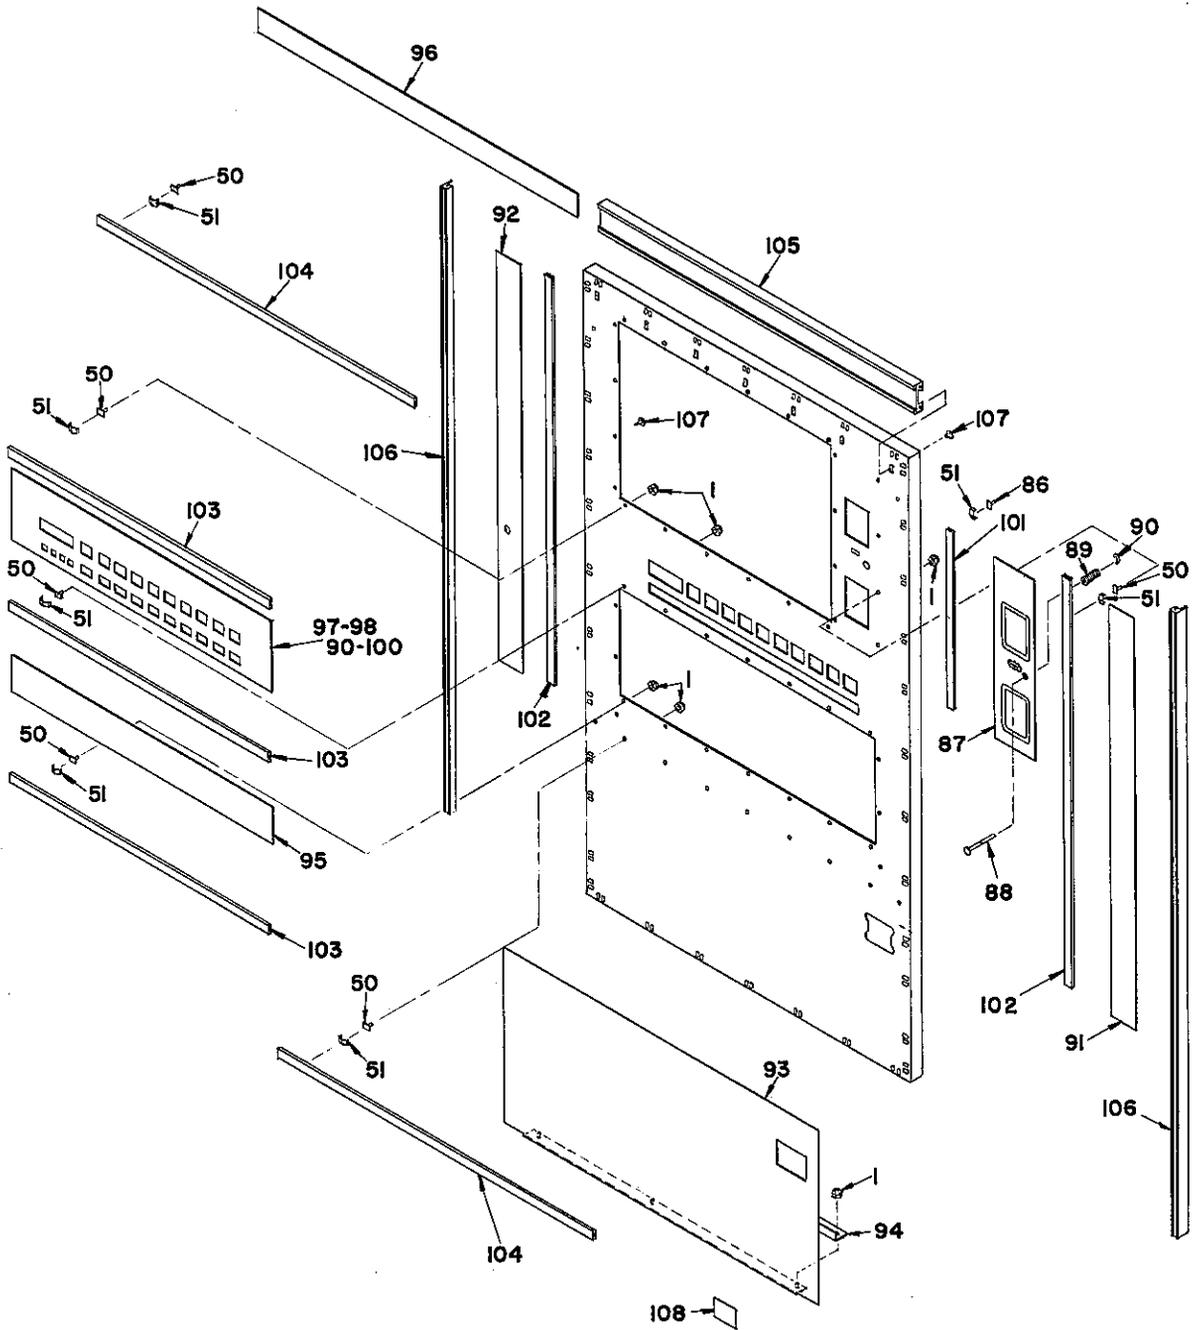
B — DOOR ASSEMBLY — ROWE AWARD
